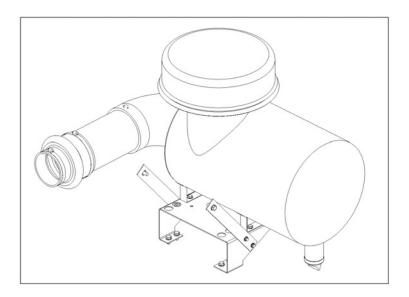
HEAVY DUTY AIR CLEANER ASSEMBLY
